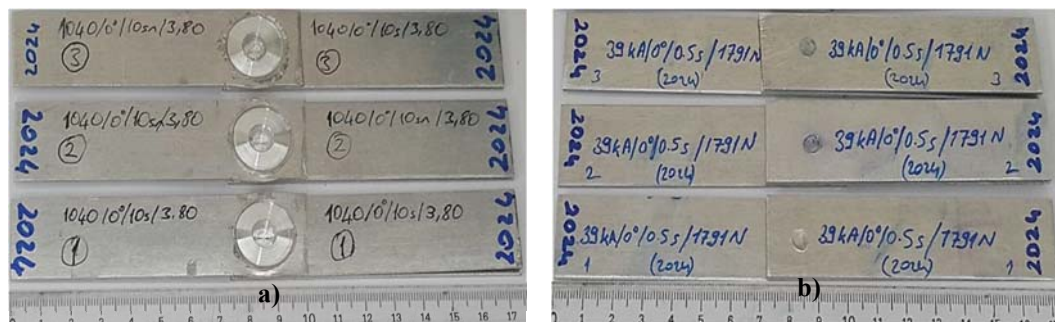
Lap-shear tensile tests specimens: a) Before test of FSSW specimens; b) Before test of ERSW specimens.
